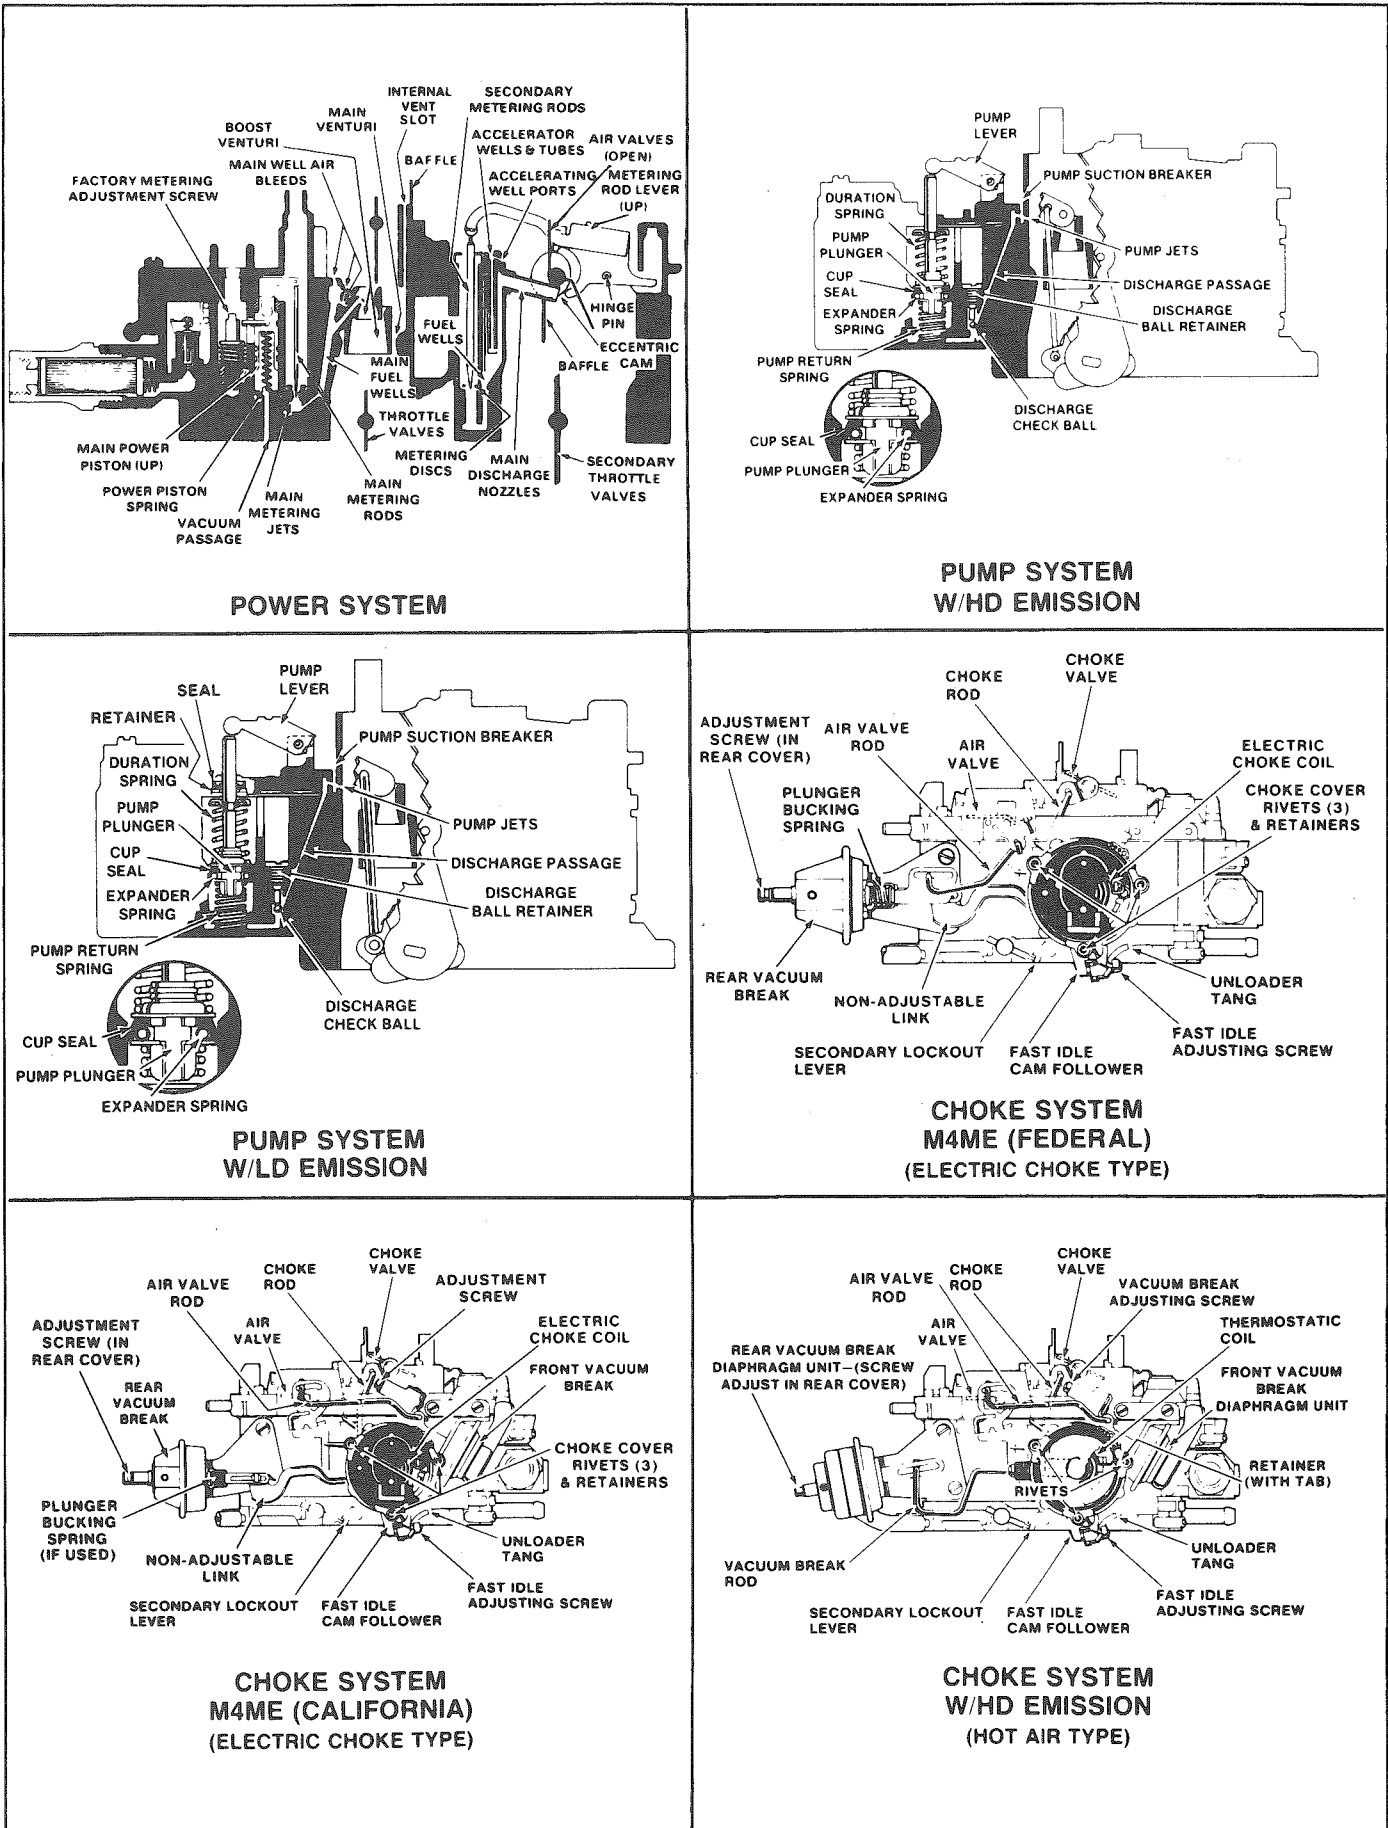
Carburetor Model M4MC (Power, Pump, Choke Systems)
